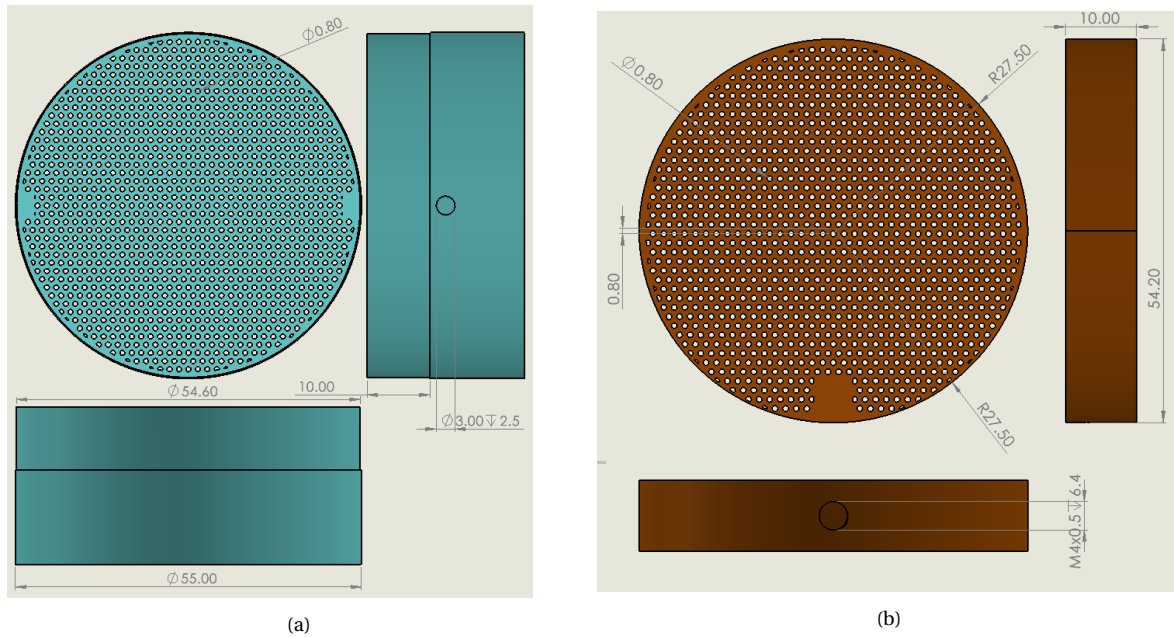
3-D printed Perforated disks for $l_h = 1.5$ mm hole spacing; (a) Top and Bottom disk; and (b): Middle disk (all dimensions are in mm)
